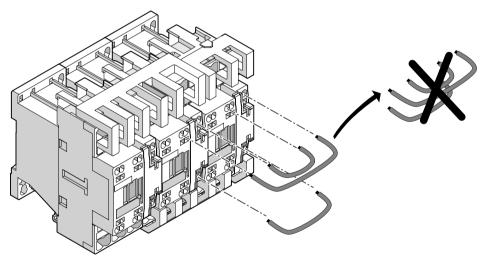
Removal of the wiring modules for connecting the control current paths on a contactor assembly for star-delta (wye-delta) start with spring-loaded connections of size S0
